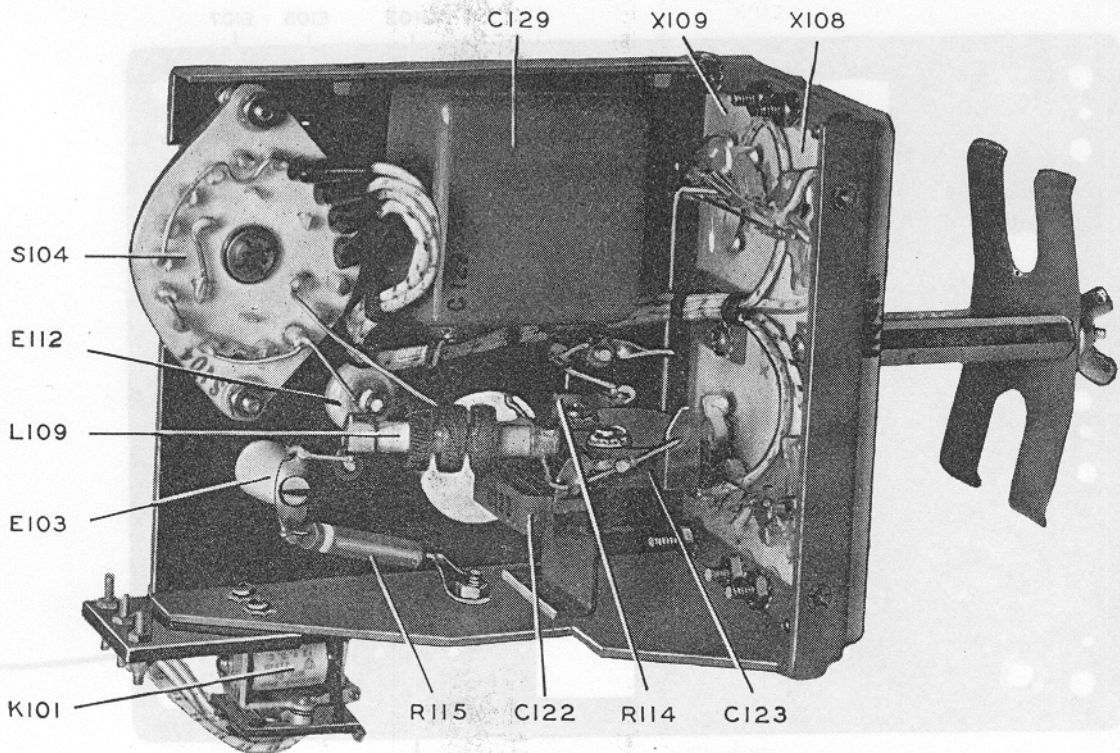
Transmitter Crystal Bracket Assembly—Bottom View
